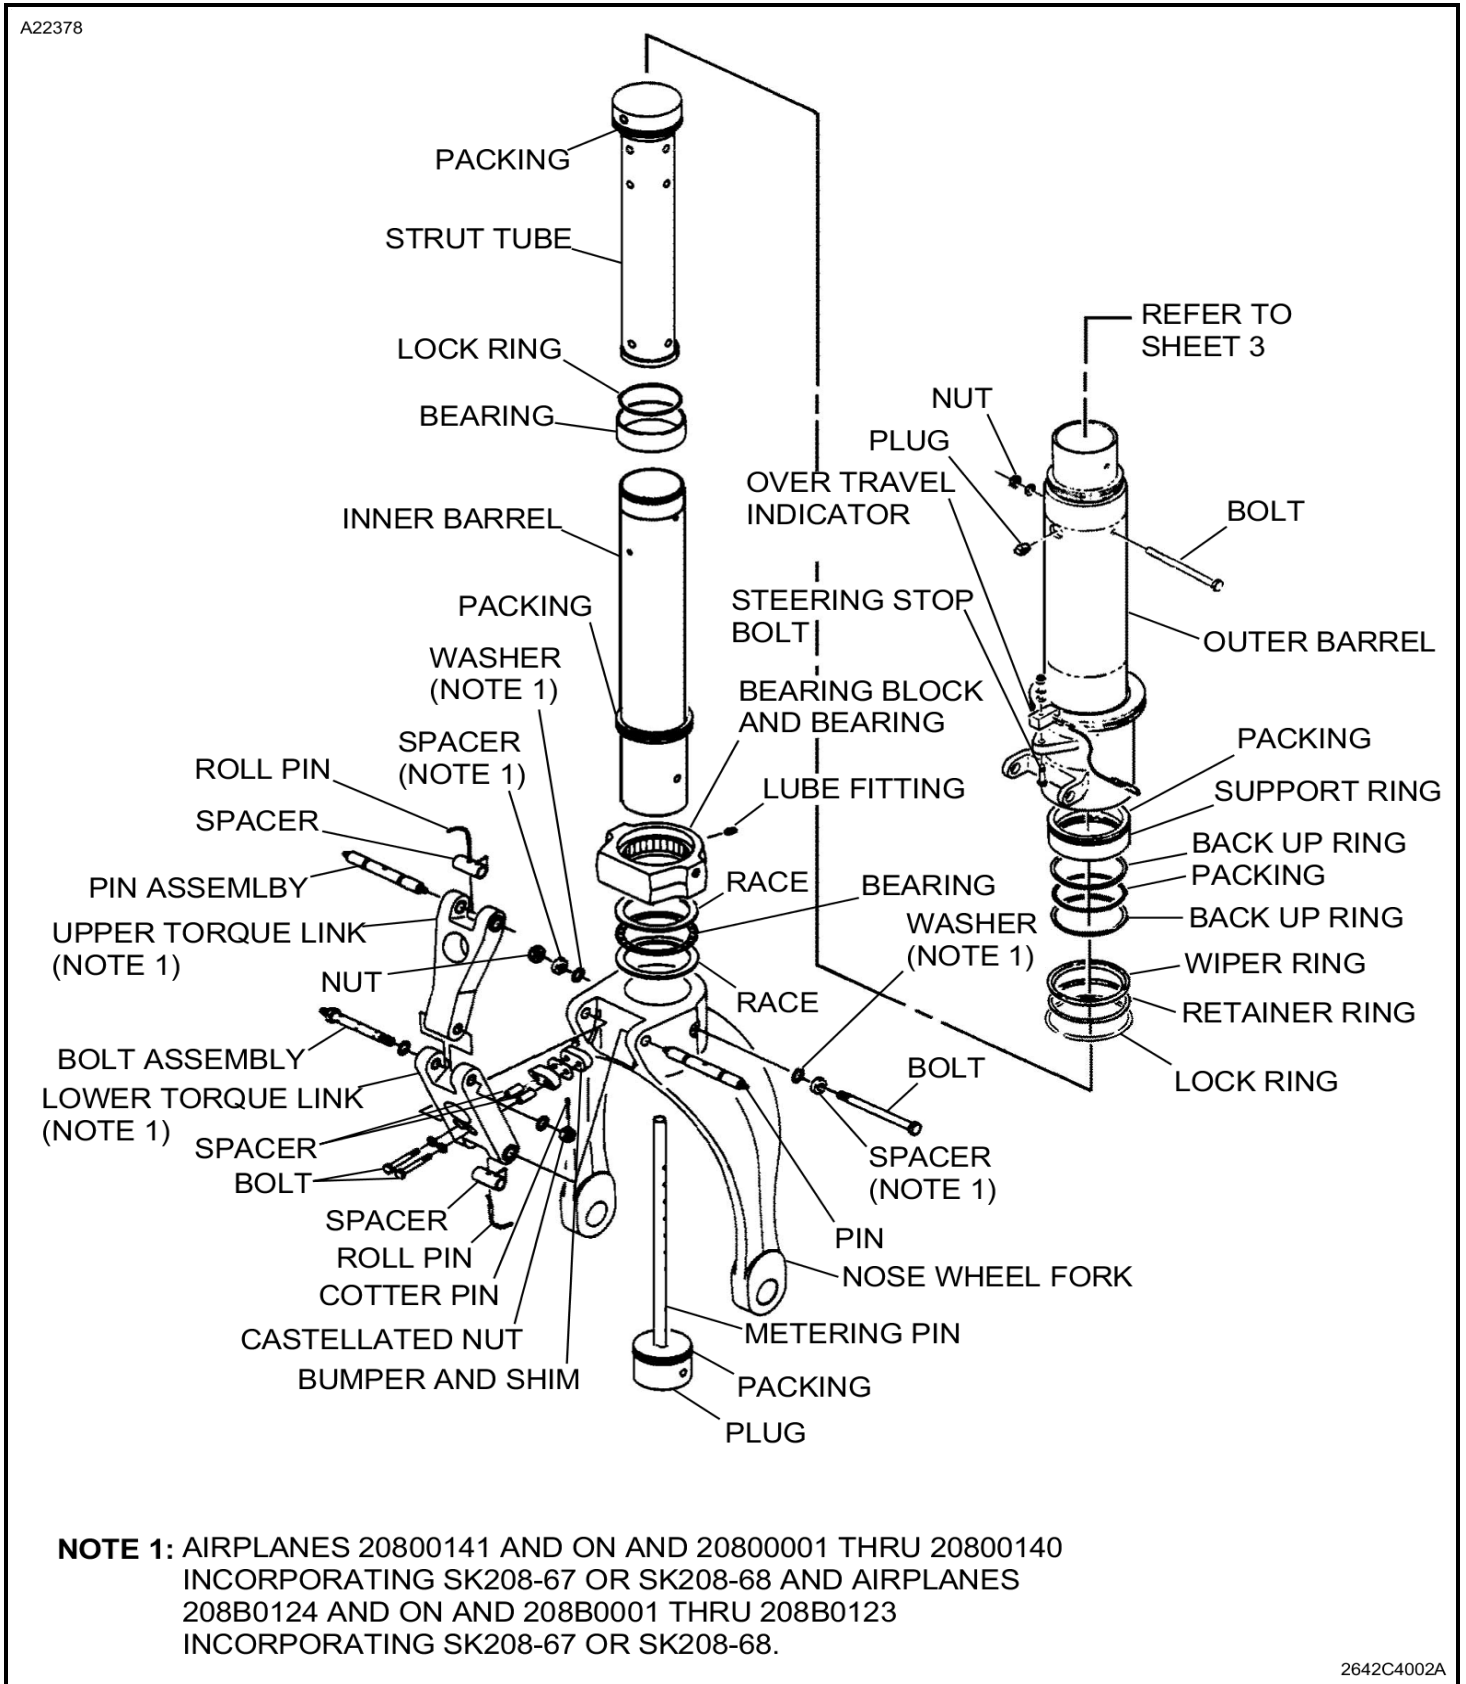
Sheet 1 : Nose Gear Shock Strut Installation
